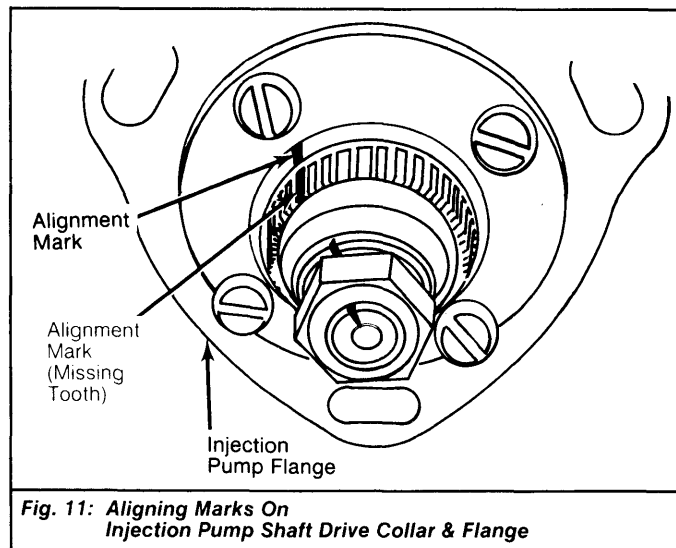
Aligning Marks On Injection Pump Shaft Drive Collar & Flange
